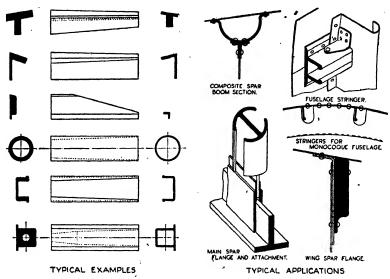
Extruded Light Alloy Sections and Some Typical Applications
